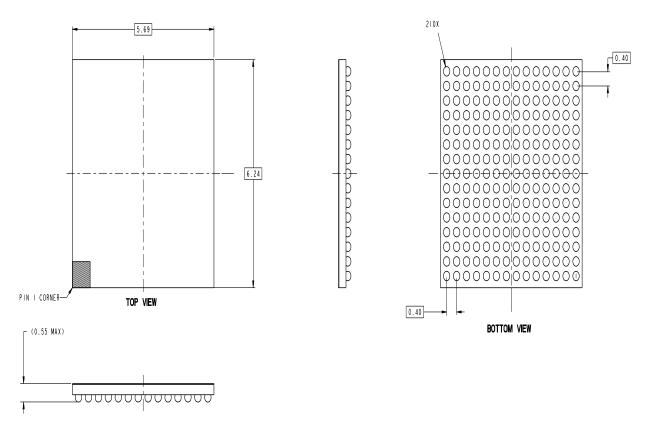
210 WLNSP (5.69 × 6.24 × 0.55 mm) package outline drawing
